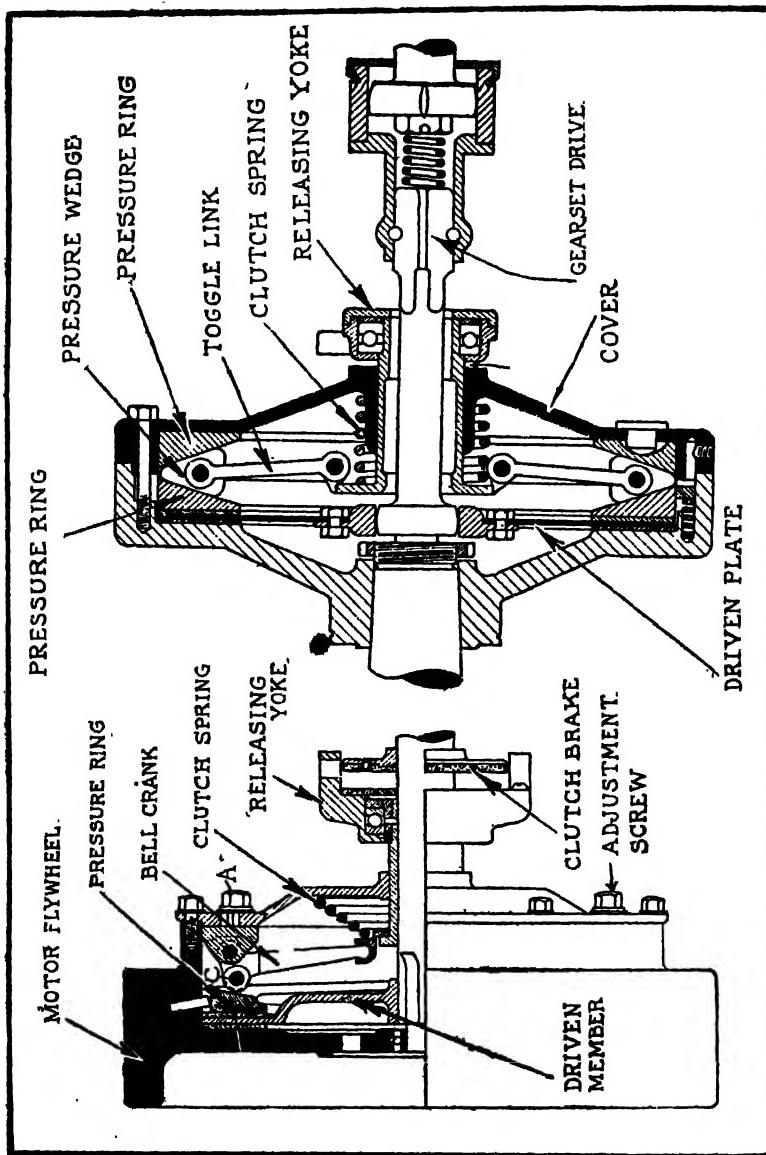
Construction of Typical Three Plate Clutches Outlined.
